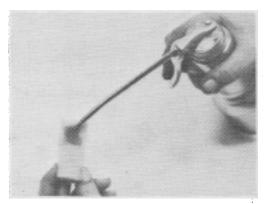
Squeeze dry and re-oil air filter with SAE 30 engine oil.
